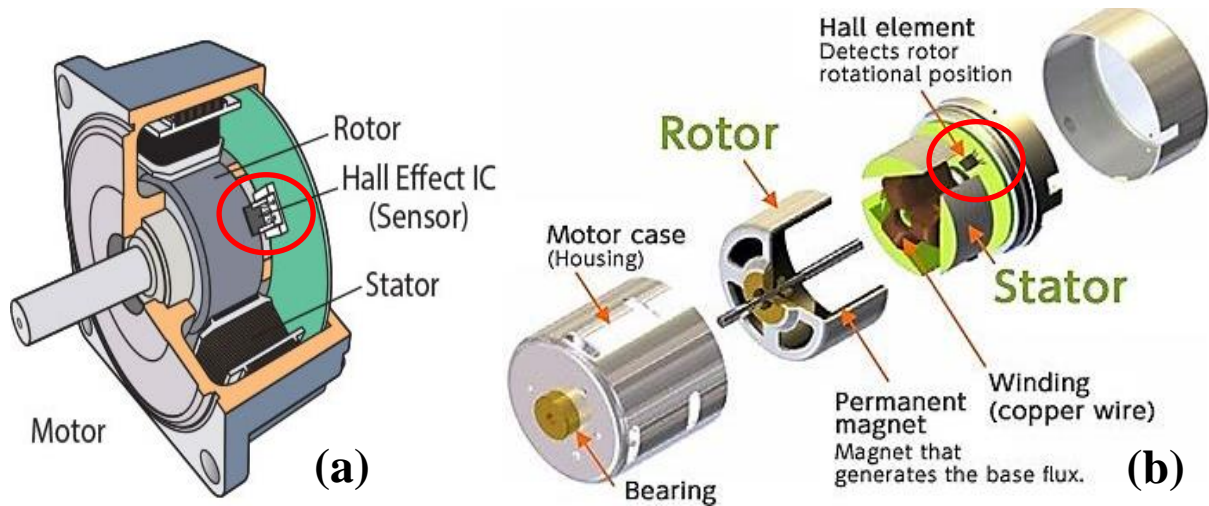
Different typologies of BLDC motors: *internal rotor motor* (a) and *external rotor motor* (b), both with Hall sensors to detect the position and speed of the rotating magnets.
